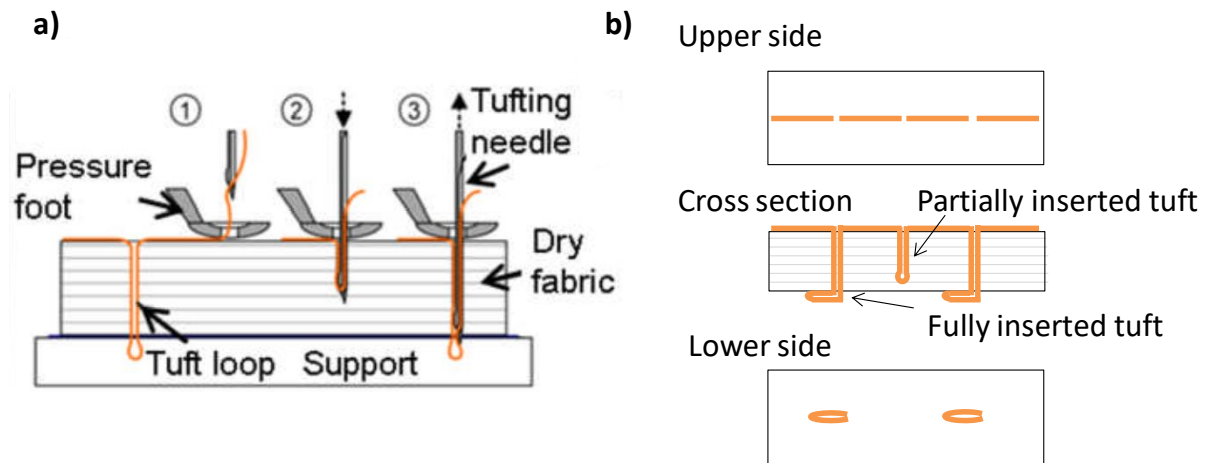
Tufting technique a) different stitching steps [79], b) stitch pattern views.
